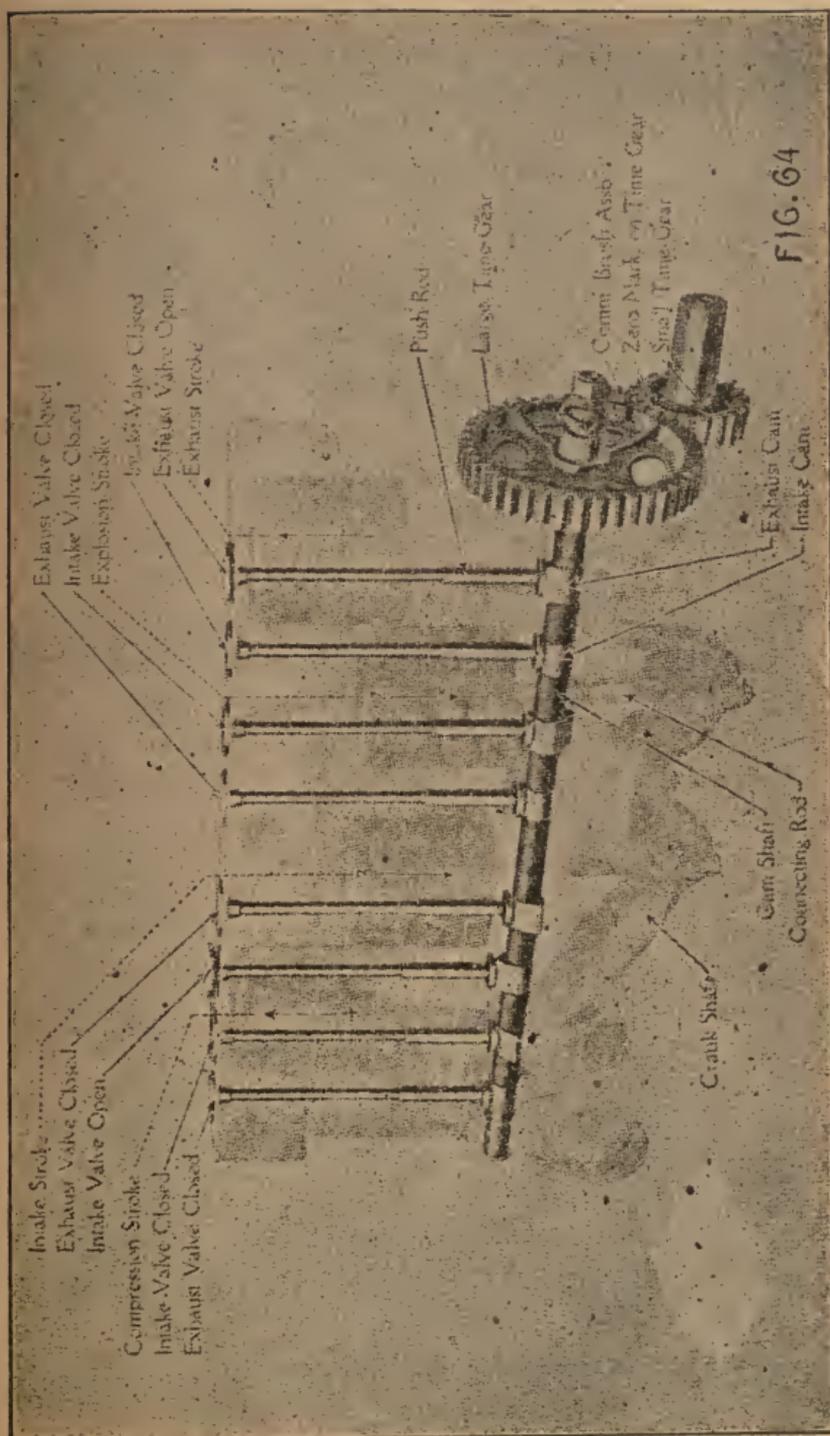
Showing assembly of cylinders, crankshaft, pistons with camshaft and valve mechanism on a four-cylinder engine.
